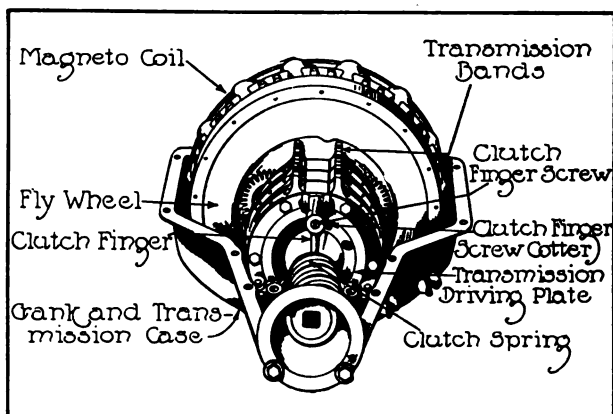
Showing Components Utilized in Adjusting Clutch of Model T Ford.
